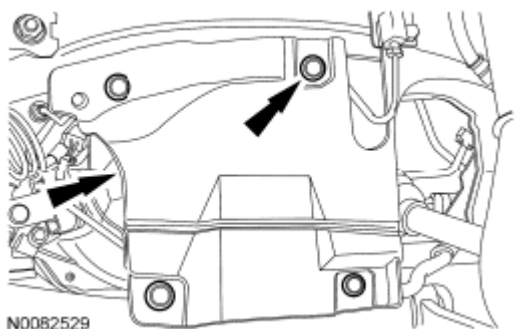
Locating LH Splash Shield & Pin-Type Retainers
